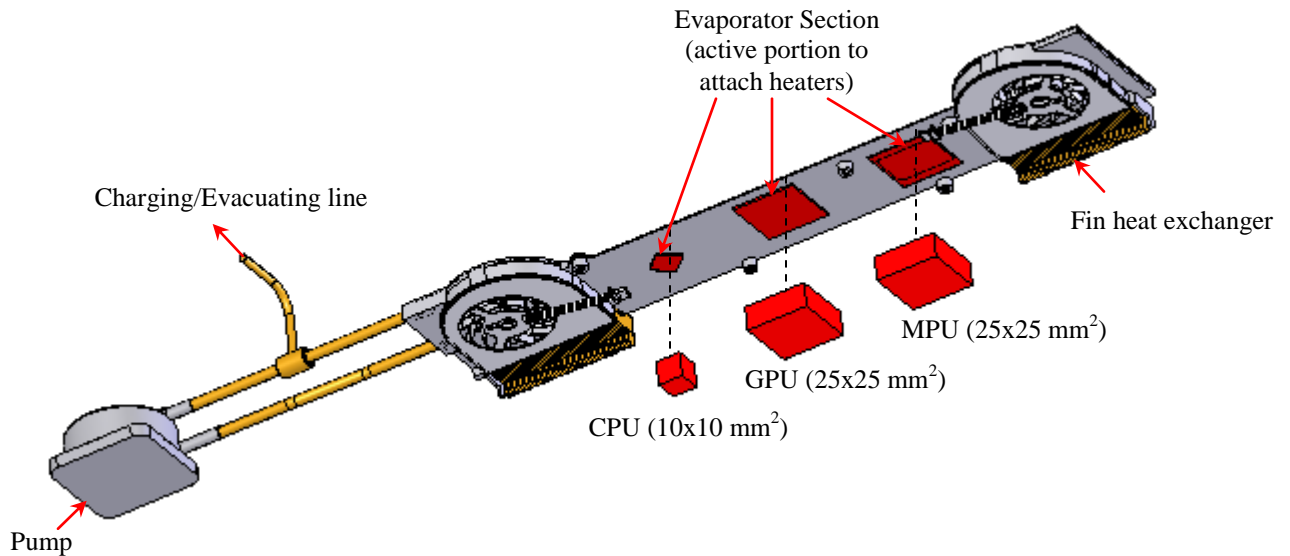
Bottom perspective view of the liquid cooling unit showing the evaporator sections and related components.
